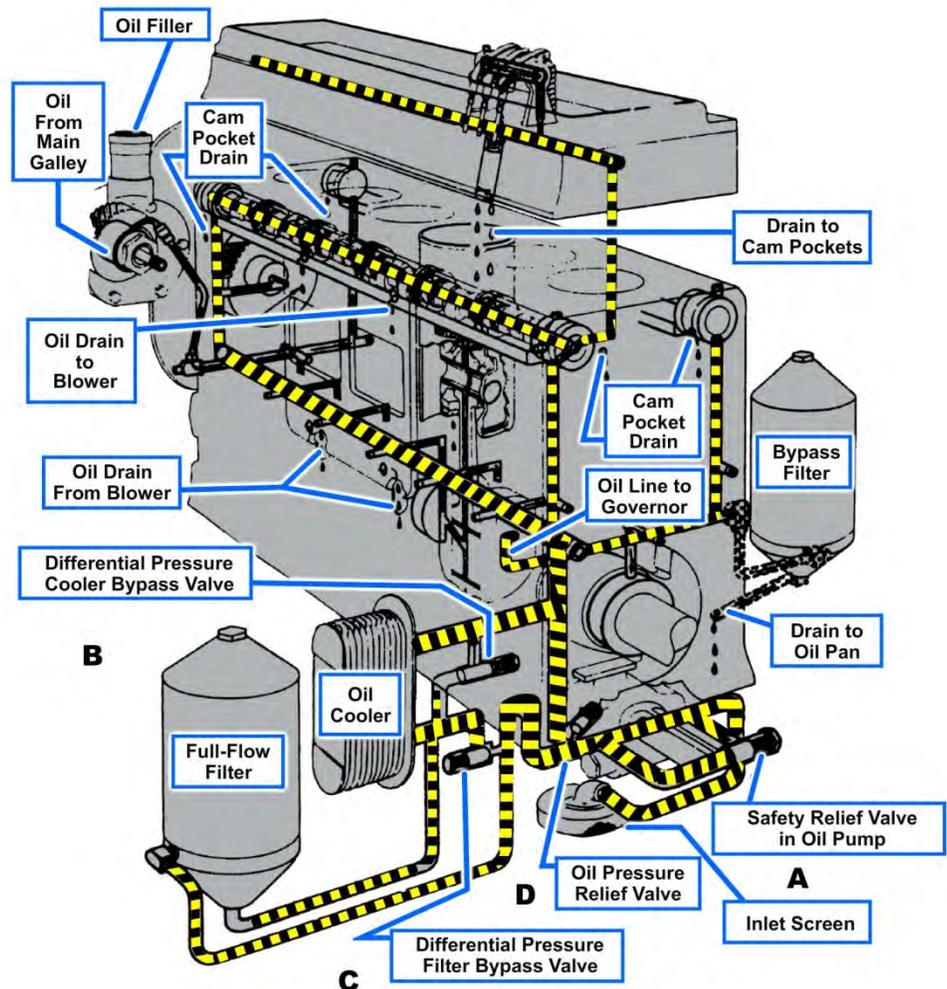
Schematic of General Motors series 71 diesel engine, typical lube oil system.
